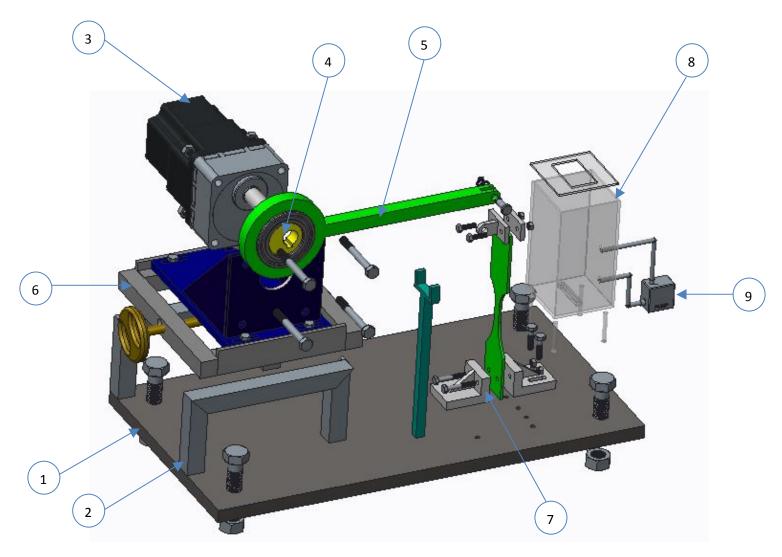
Diagram of Cantilever bending corrosion fatigue testing machine
